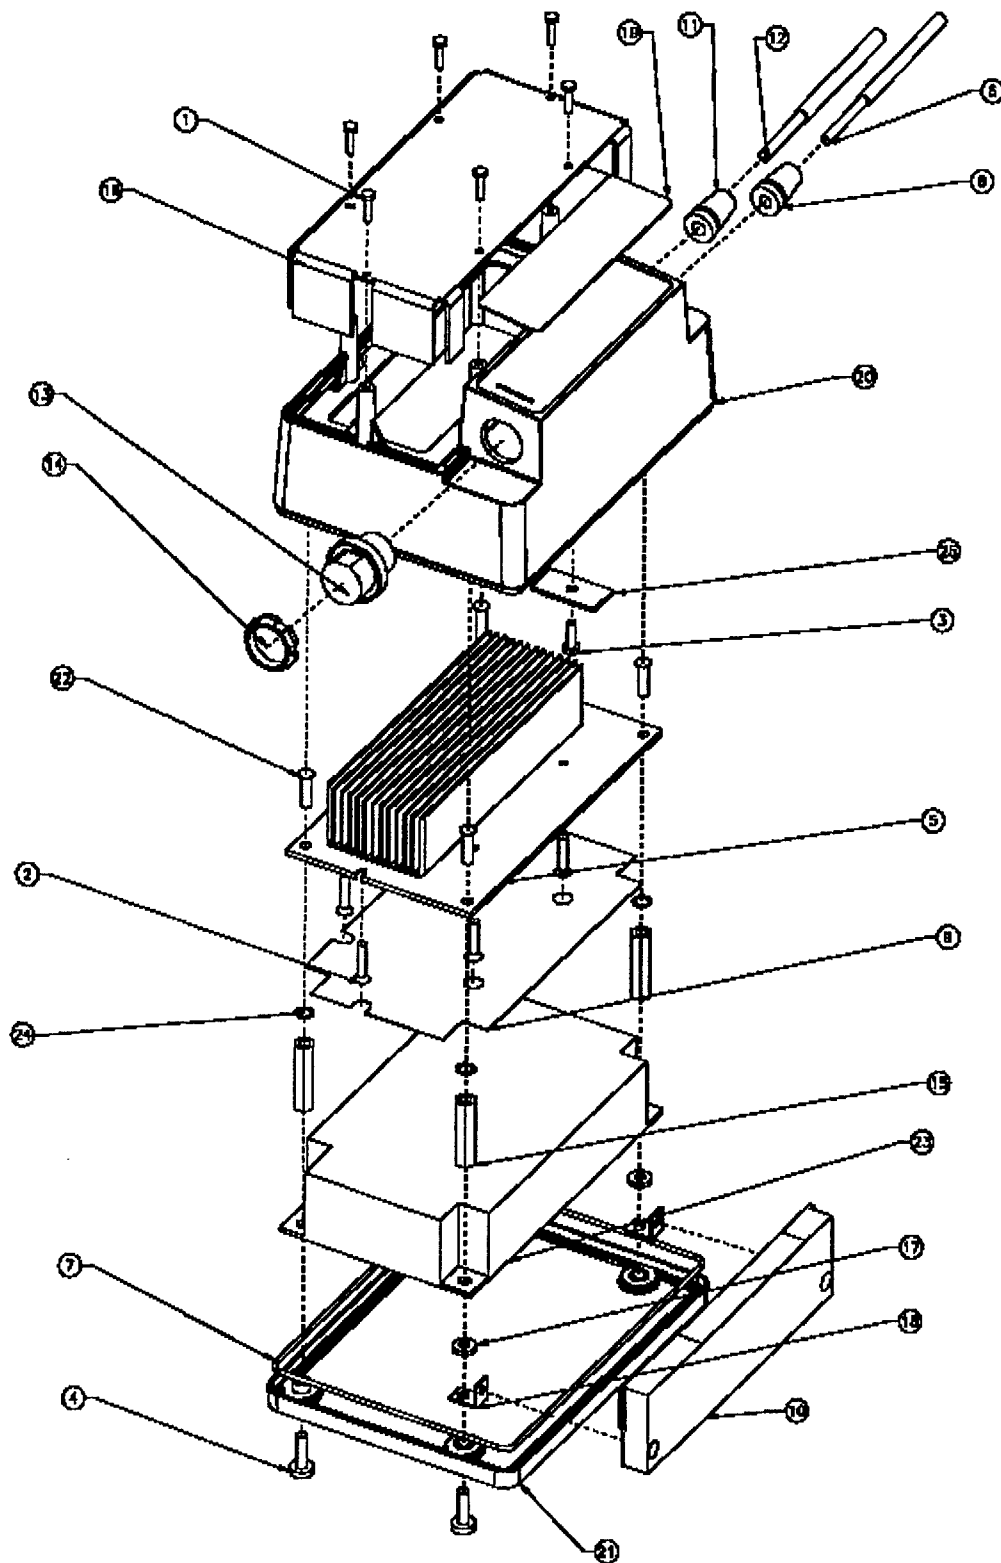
Exploded-view drawing of the final case design and charger assembly.
